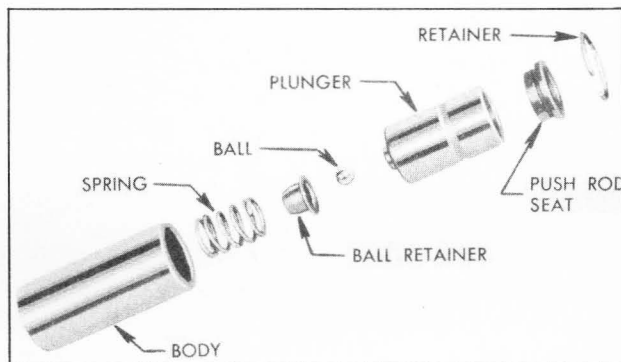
Hydraulic Valve Lifter, Disassembled
